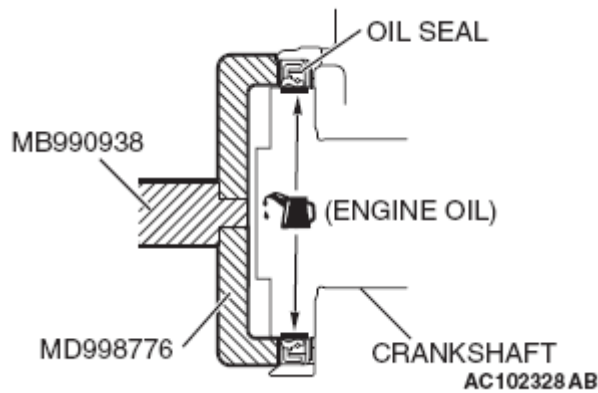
Inner Diameter Of Crankshaft Rear Oil Seal Lip Engine Oil Applying Area
